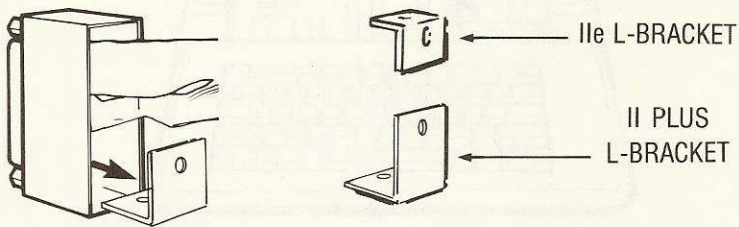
Install //e L-bracket in top of cable clamp and] [Plus L-bracket in bottom of clamp
